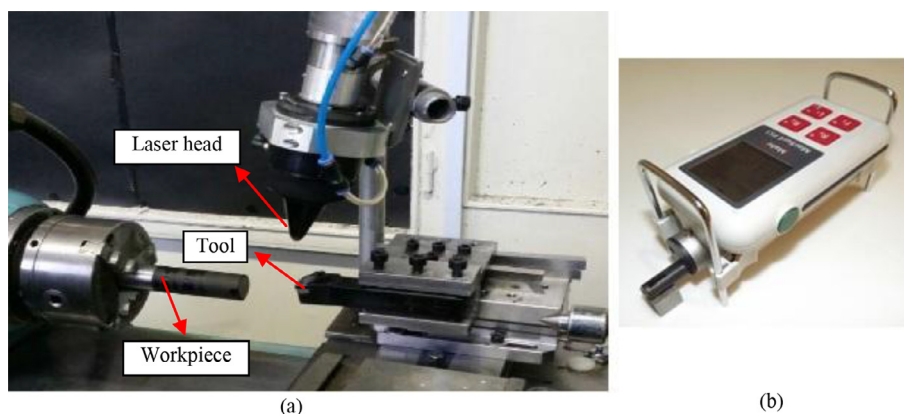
Equipment used in this research (a) machine tool, (b) roughness meter device.
